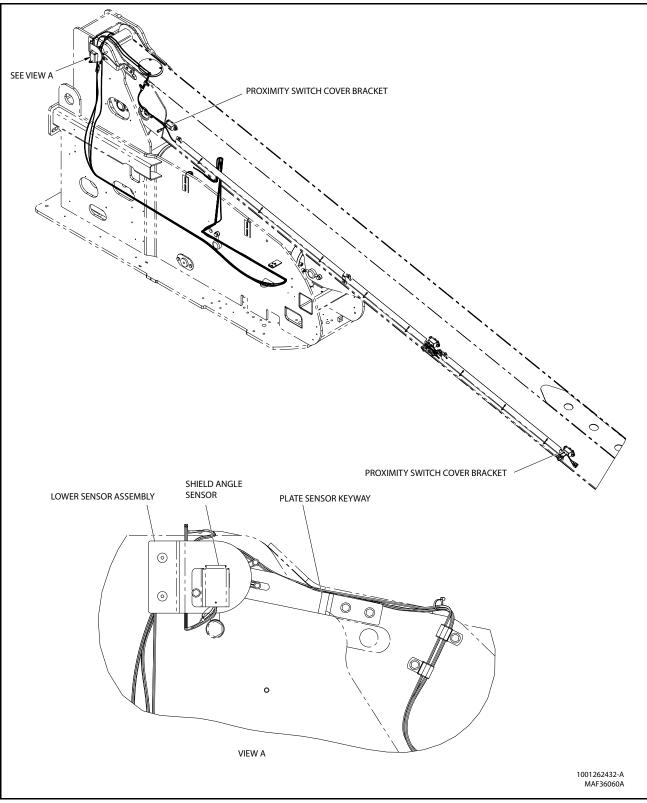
Capacity Switch Installation - Sheet 1 of 2
